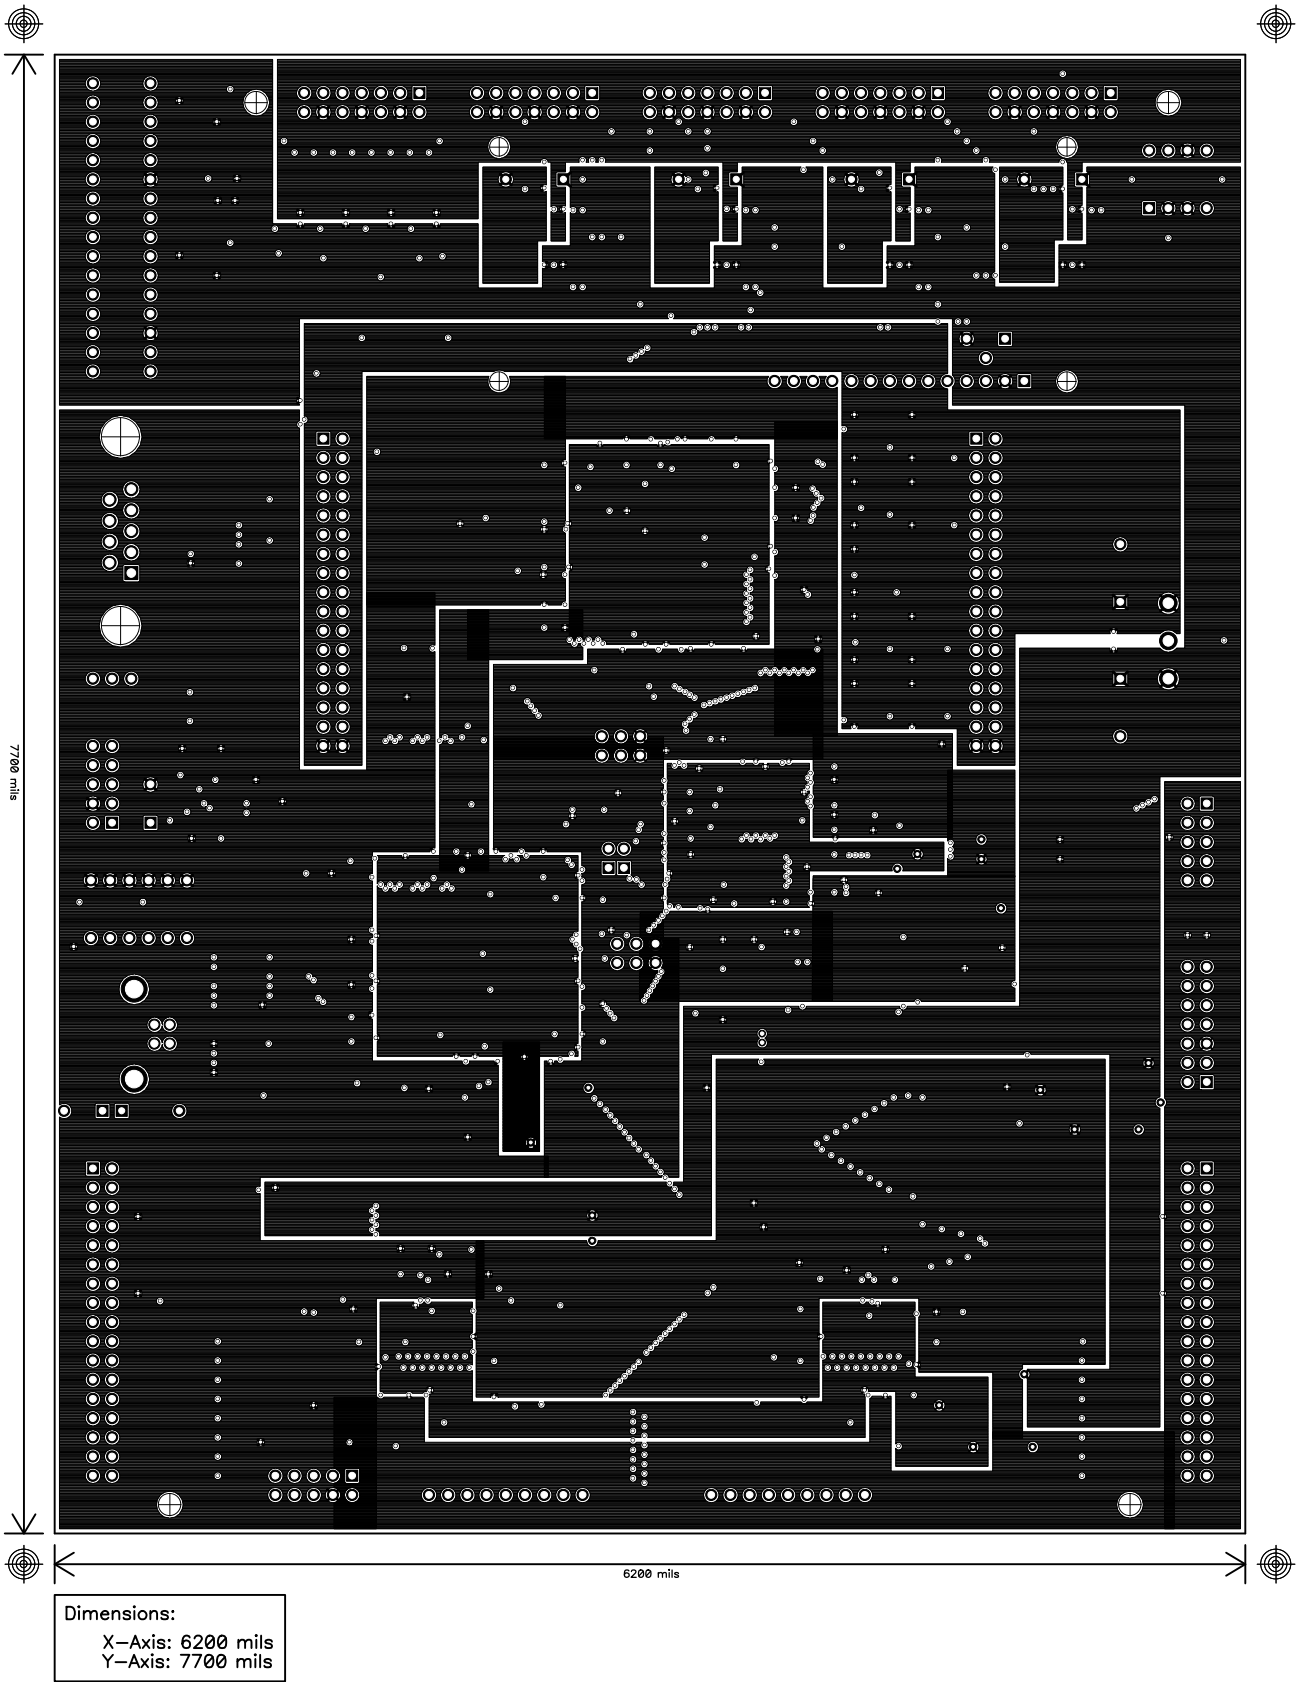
Printed Circuit Board Layout of the PEC33 TOP Layer
